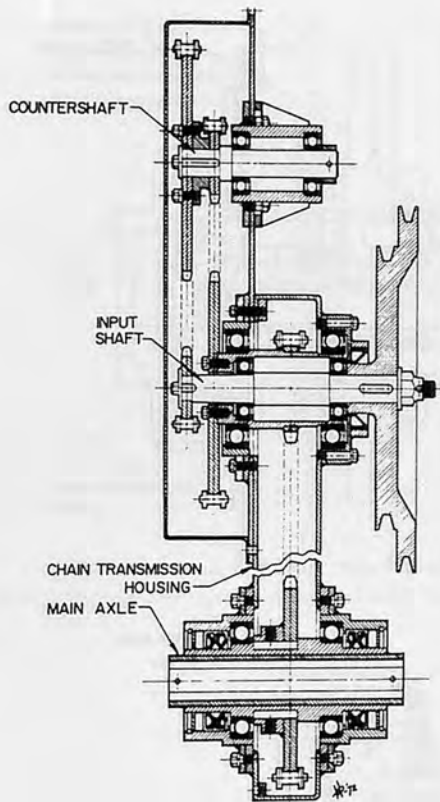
Schematic drawing of 5-7 hp. IRR I Power Tiller Transmission
